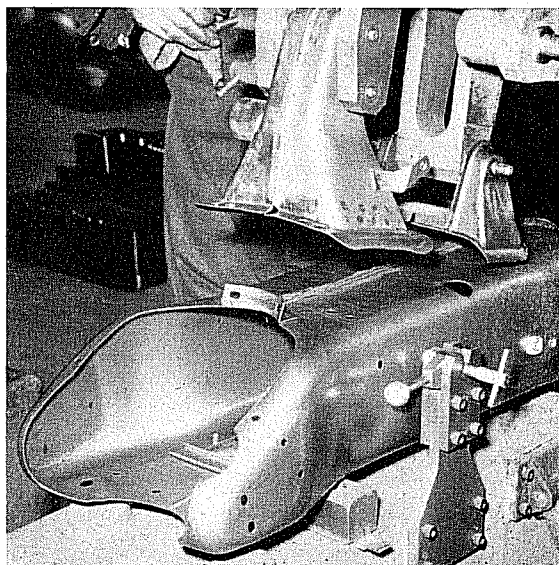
(right).—Drawing of frame welding assembly
